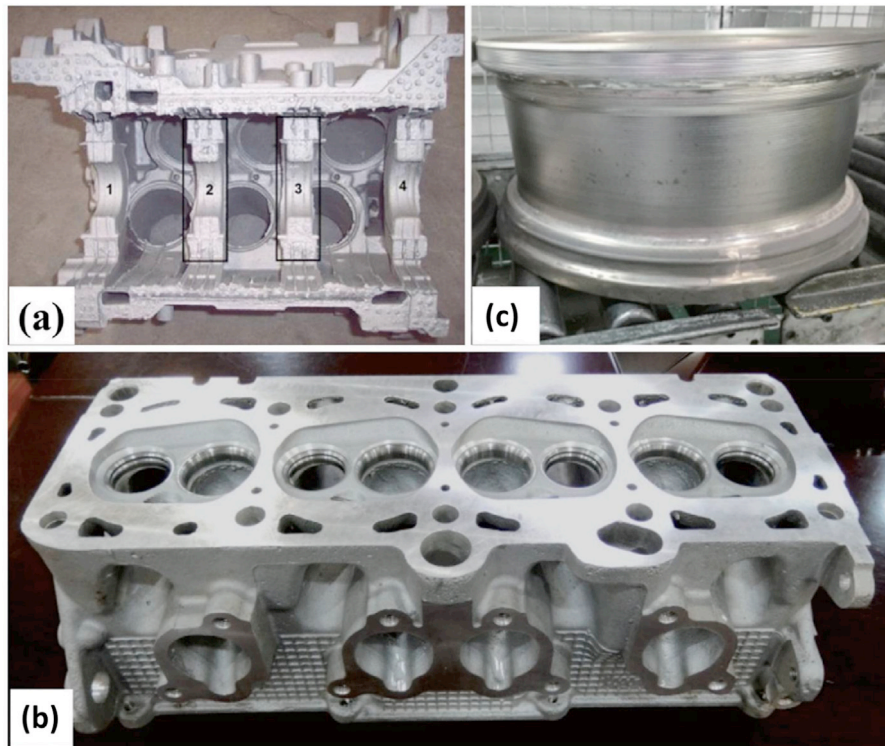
(a) V6 engine block casted via low pressure casting process (b) Engine cylinder head fabricated via tilt-pouring method (c) Car wheel fabricated via sand casting and flow process. Reproduced with permission from Elsevier [235].
